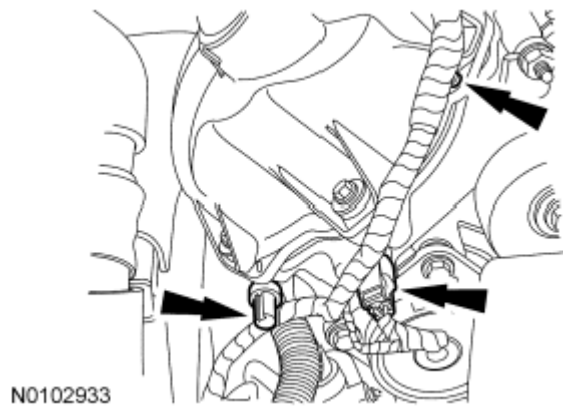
Locating RH CMP Sensor Electrical Connector And Wiring Harness Retainers
